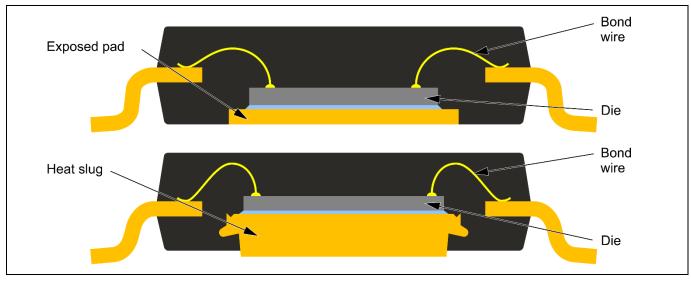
Schematics showing the inner setup of gullwing leaded packages with exposed pad (top) and with heat slug (bottom).
